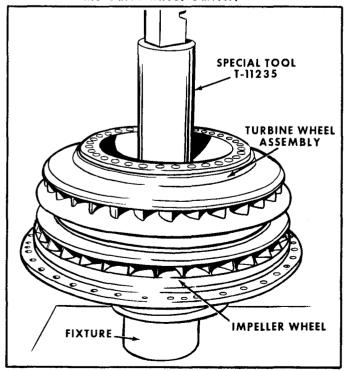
Installing the Turbine Wheel Assembly on the Output Shaft with Special Tool T-11235.
